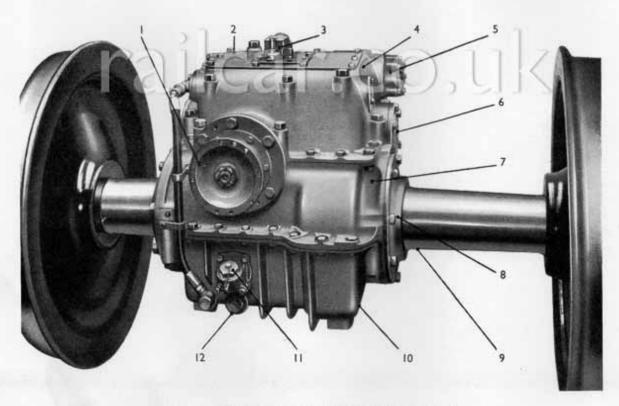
VIEW OF COMPLETE UNIT MOUNTED ON AXLE
